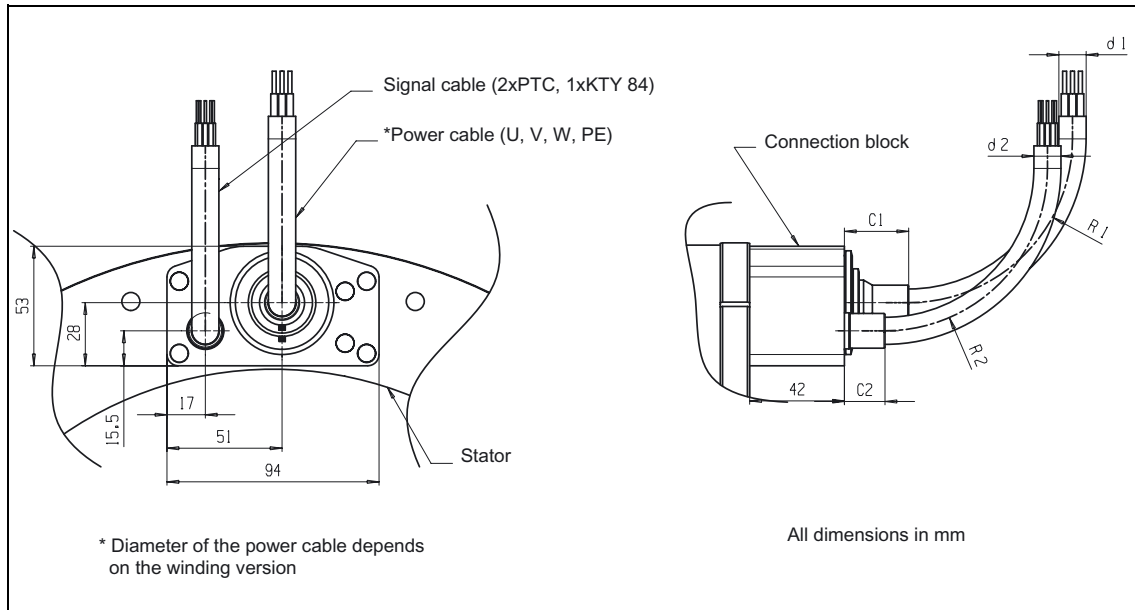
Axial electrical connection with sleeve for 1FW6160, 1FW6190 and 1FW6230 (motor type B)
